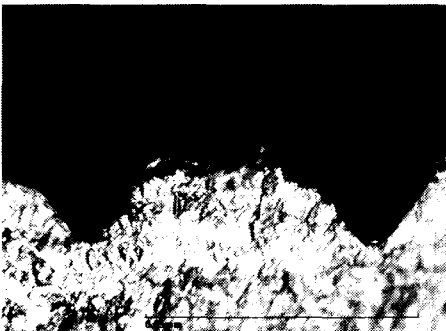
Lateral view of machined V grooves on polycarbonate(0.67 mm/s, 2 μm)
